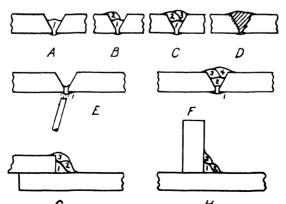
Multiple bead are welds: A First bead (stringer bead), B Second bead, C Third bead, D Finished weld, E Overhead weld penetration bead, F Finished weld, G Three bead lap weld, H Three bead tee weld
